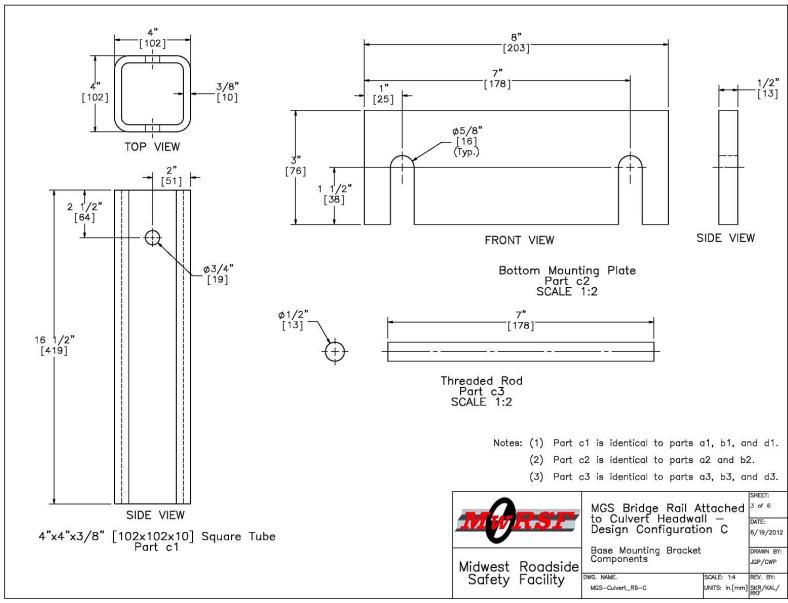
Design Concept C, Tube and Bottom Mounting Plate Details
